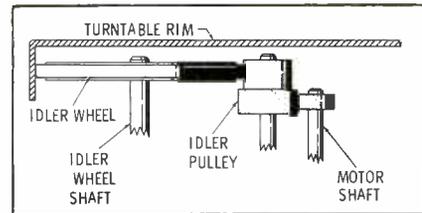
Side view of pulley and wheel arrangement for turret drive system. slows the speed, but these parts should be checked anyway. Next, try to turn the motor rotor by hand.
